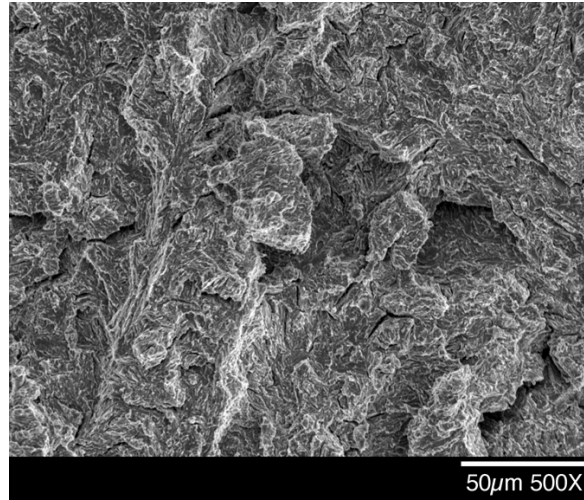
Fracture surface from region of hydrogen-assisted fracture in SA 372 Gr. J.
